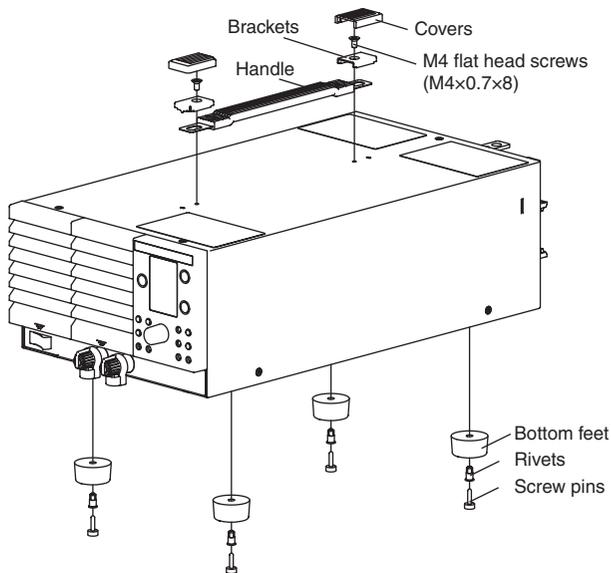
Removing the handle and feet (400 W and 800 W types)
